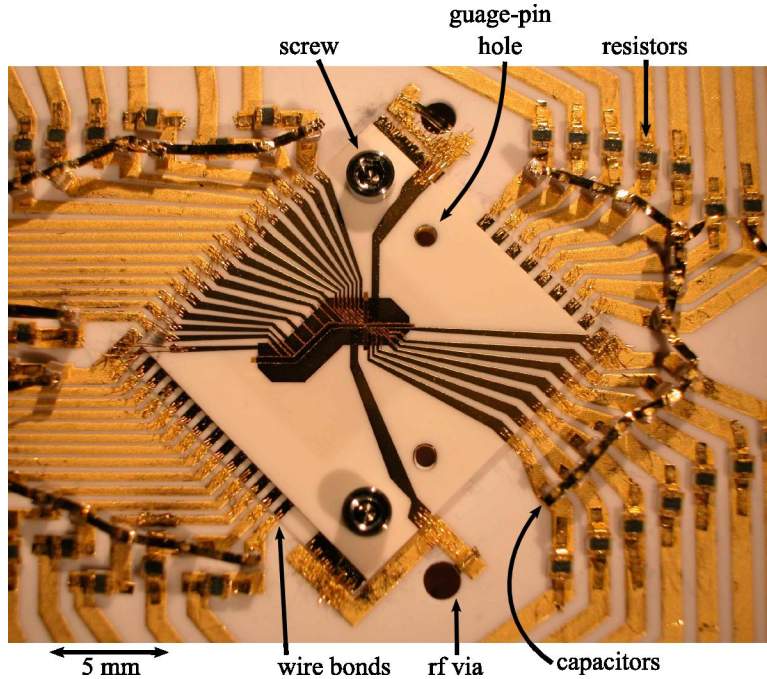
Photograph of the assembled trap. Three wires bonds were made per control-electrode trace, primarily for redundancy.
